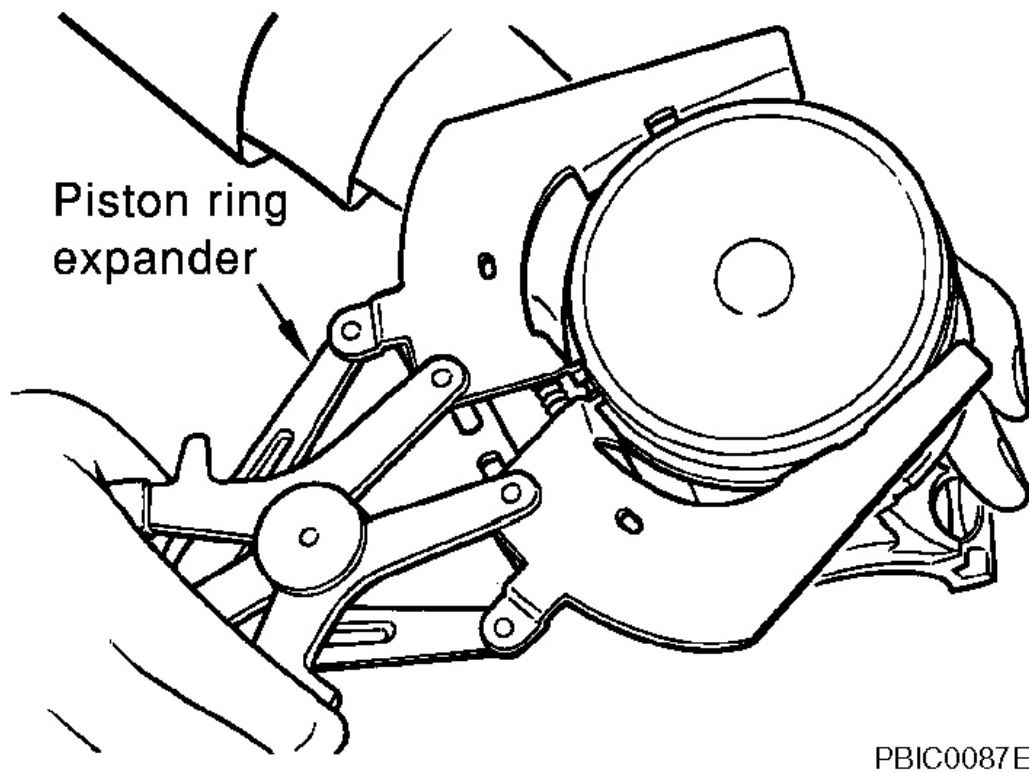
Installing Piston Rings By Using Piston Ring Expander
